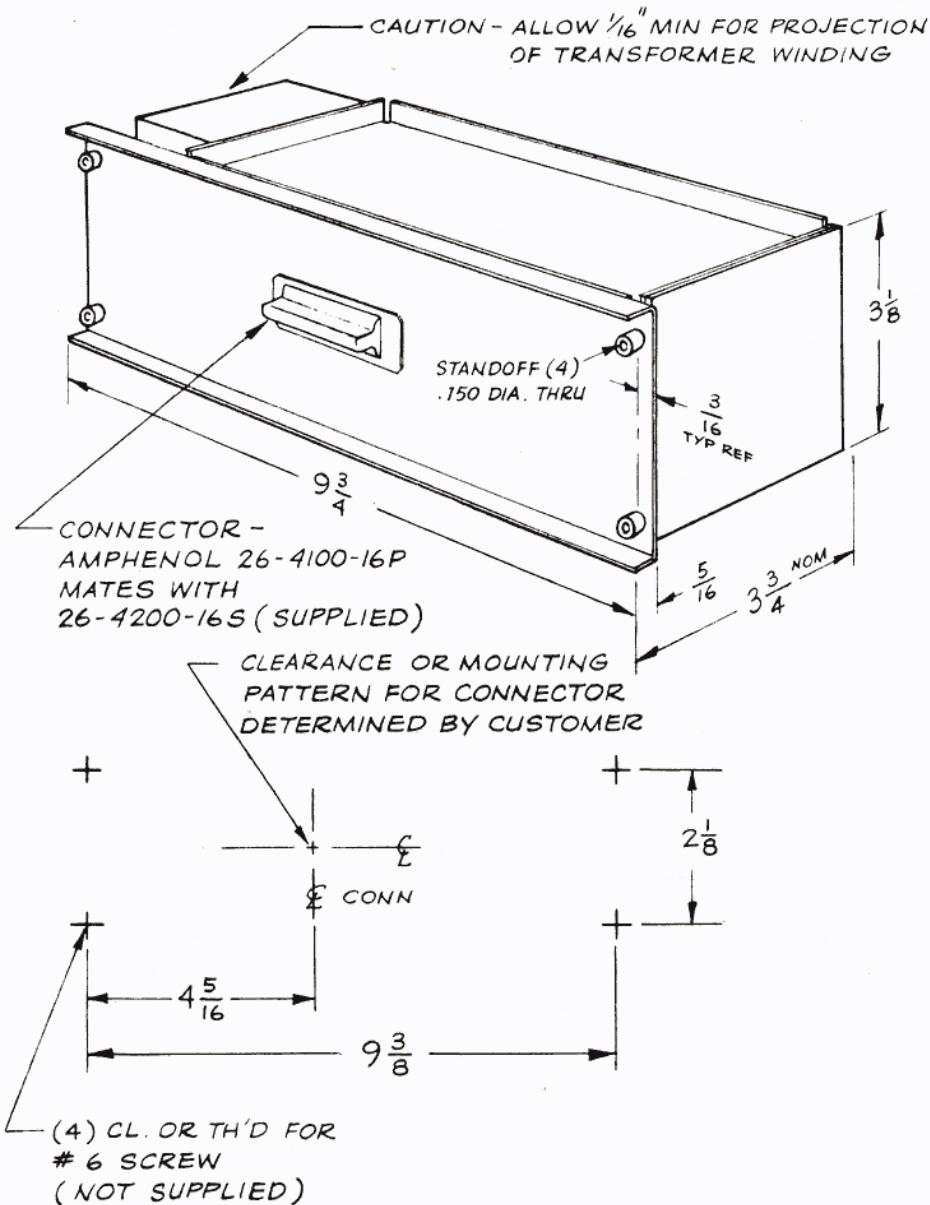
Outline and Mounting Dimensions of Models PR-300 & PR-300C
